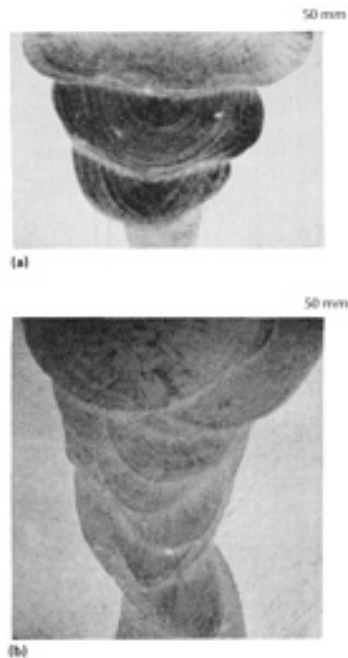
EFFECT OF MAGNETIC OSCILLATION ON WELD DISTORTION IN 25 MM ($\frac{1}{2}$ IN.) THICK STAINLESS STEEL. (A) WELD PRODUCED WITH ARC OSCILLATION. (B) STRINGER BEADS PRODUCED IN WELD WITHOUT ARC OSCILLATION. NOTE MINIMAL UPSETTING WITH ARC OSCILLATION. SOURCE: REF 8
